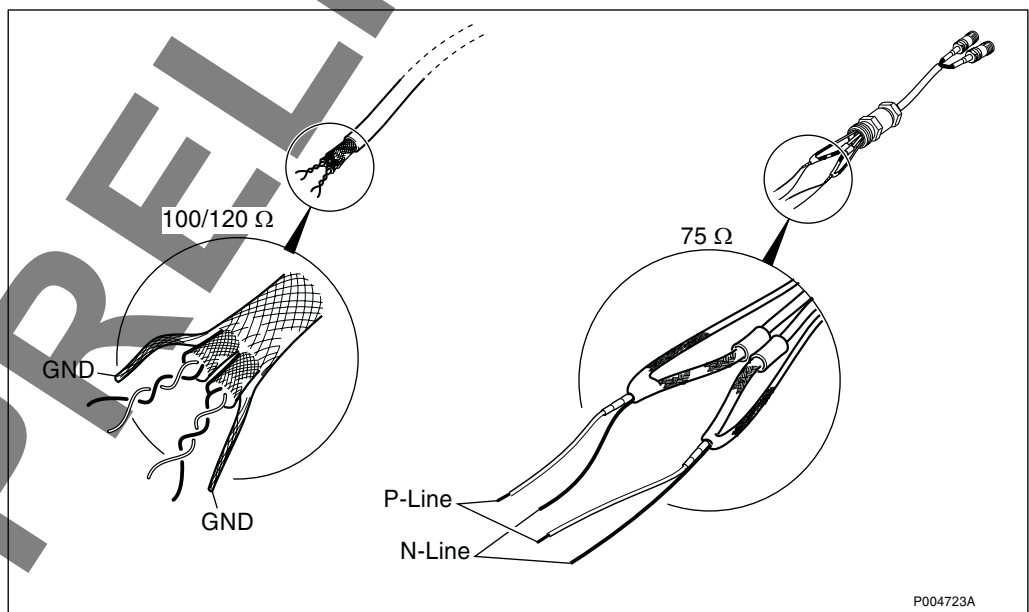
The 100/120 Ω twisted pair PCM cable, and the 75 Ω PCM connection cable with coaxial connectors
